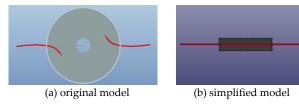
CUTTERHEAD AND CUTTING TOOL MODEL
